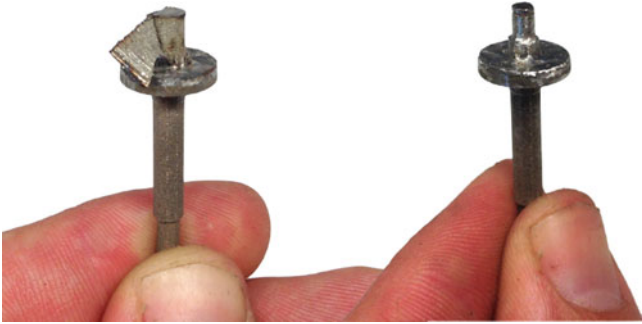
The final stage of preparing the shaft where the metal support material is 'peeled' off layer by layer
